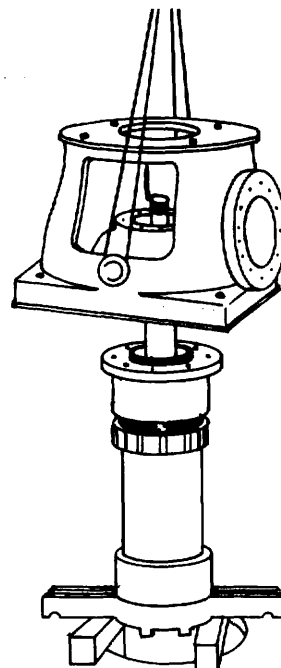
METHOD OF RIGGING HEADS FOR LIFTING.
